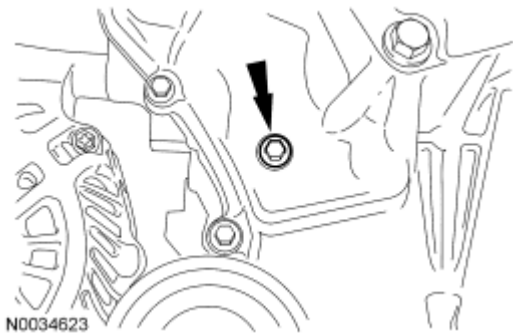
Locating Upper Front Cover Timing Hole Plug
